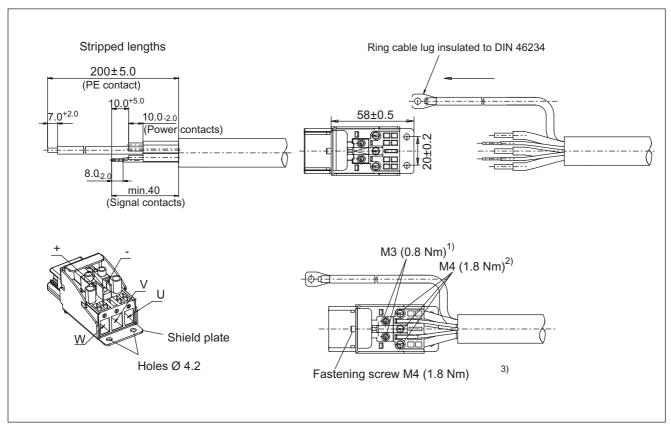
Setting up and installing the power supply connector (X1/X2)
